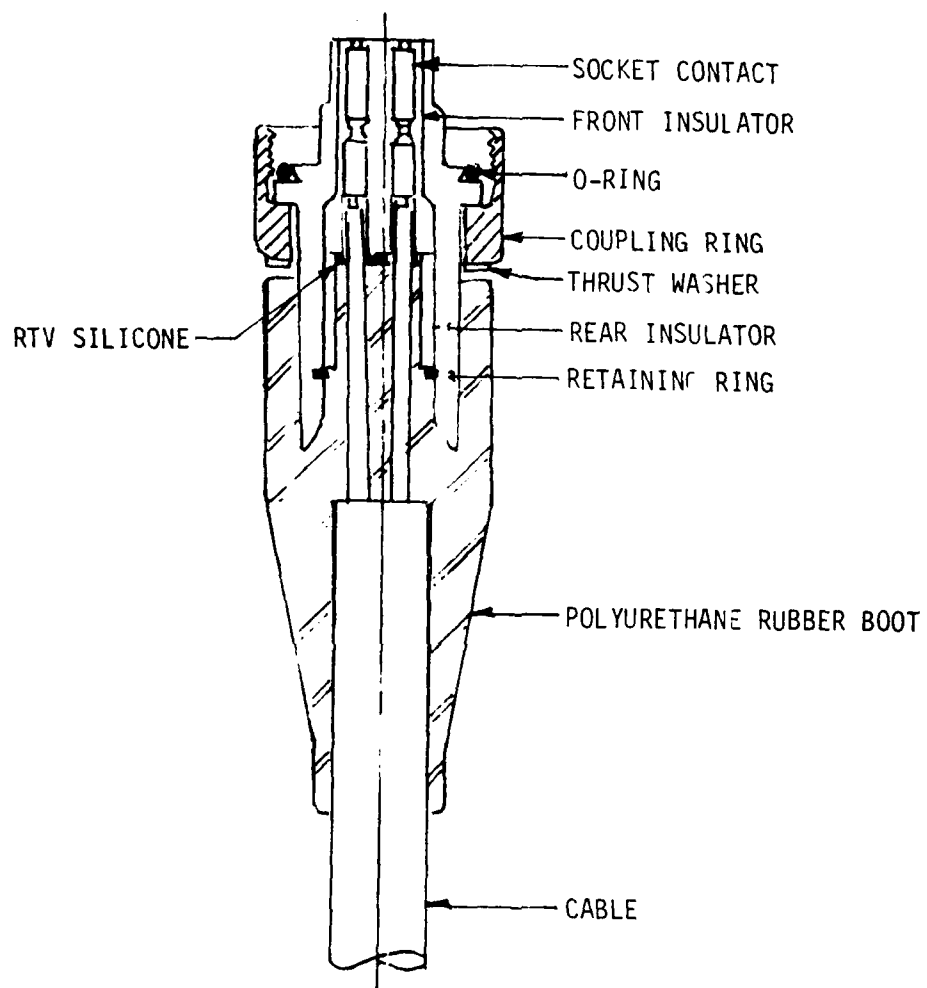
POLYURETHANE MOLDED MIL-C-24217 PLUG ASSEMBLY
